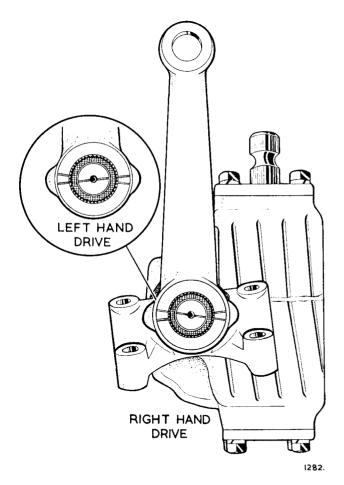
Showing the alignment of the drop arm/rocker shaft marks for both right hand and left hand steering.
